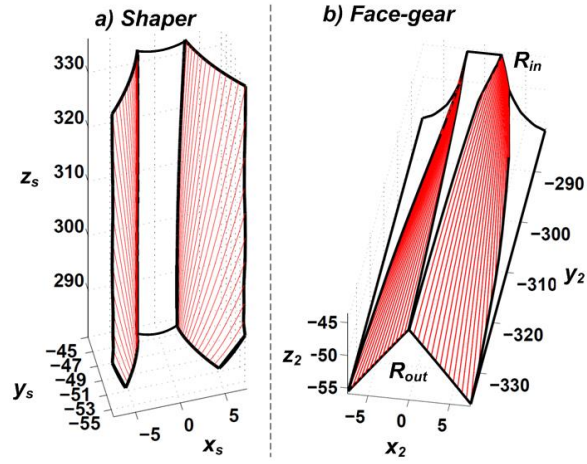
a) Shaper tooth space, b) Face-gear tooth flank in their local coordinate frames
